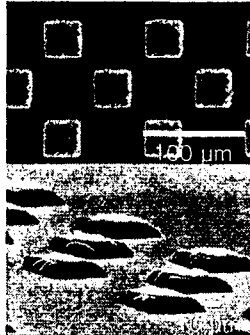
Standard flip chip array with eutectic Sn/Pb solder bumps
